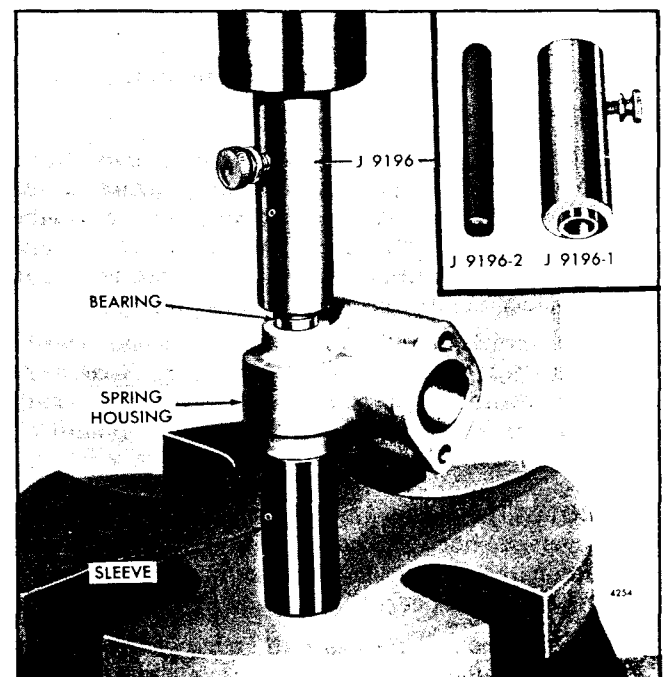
Installing Speed Control Shaft Bearings In Spring Housing
